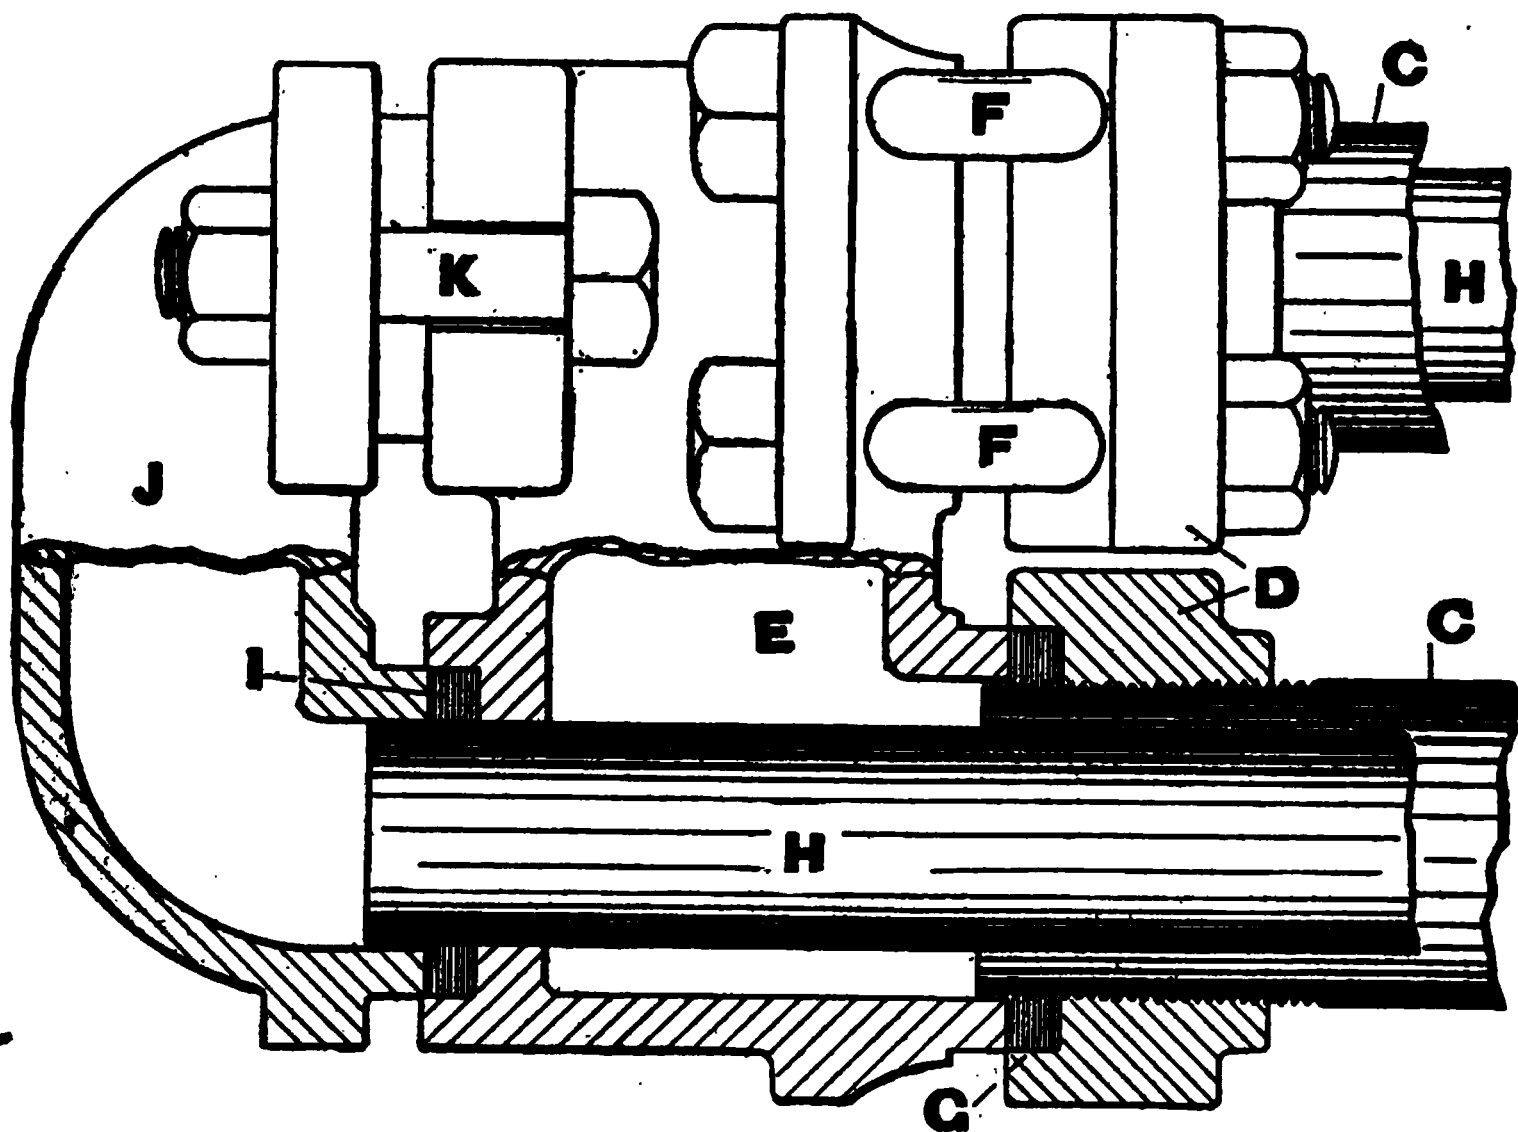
,543.—Detail of double pipe return bend. The ammonia pipes C, C, are screwed into the flanges D, and to these flanges the casting E, is held by the bolts F, F, compressing the soft packing G. The inner pipes H, H, are for the water circulation, the joints being made tight by means of the soft packing rings I, around each end of the pipe, which are compressed by the return bend J, and the bolts K.
